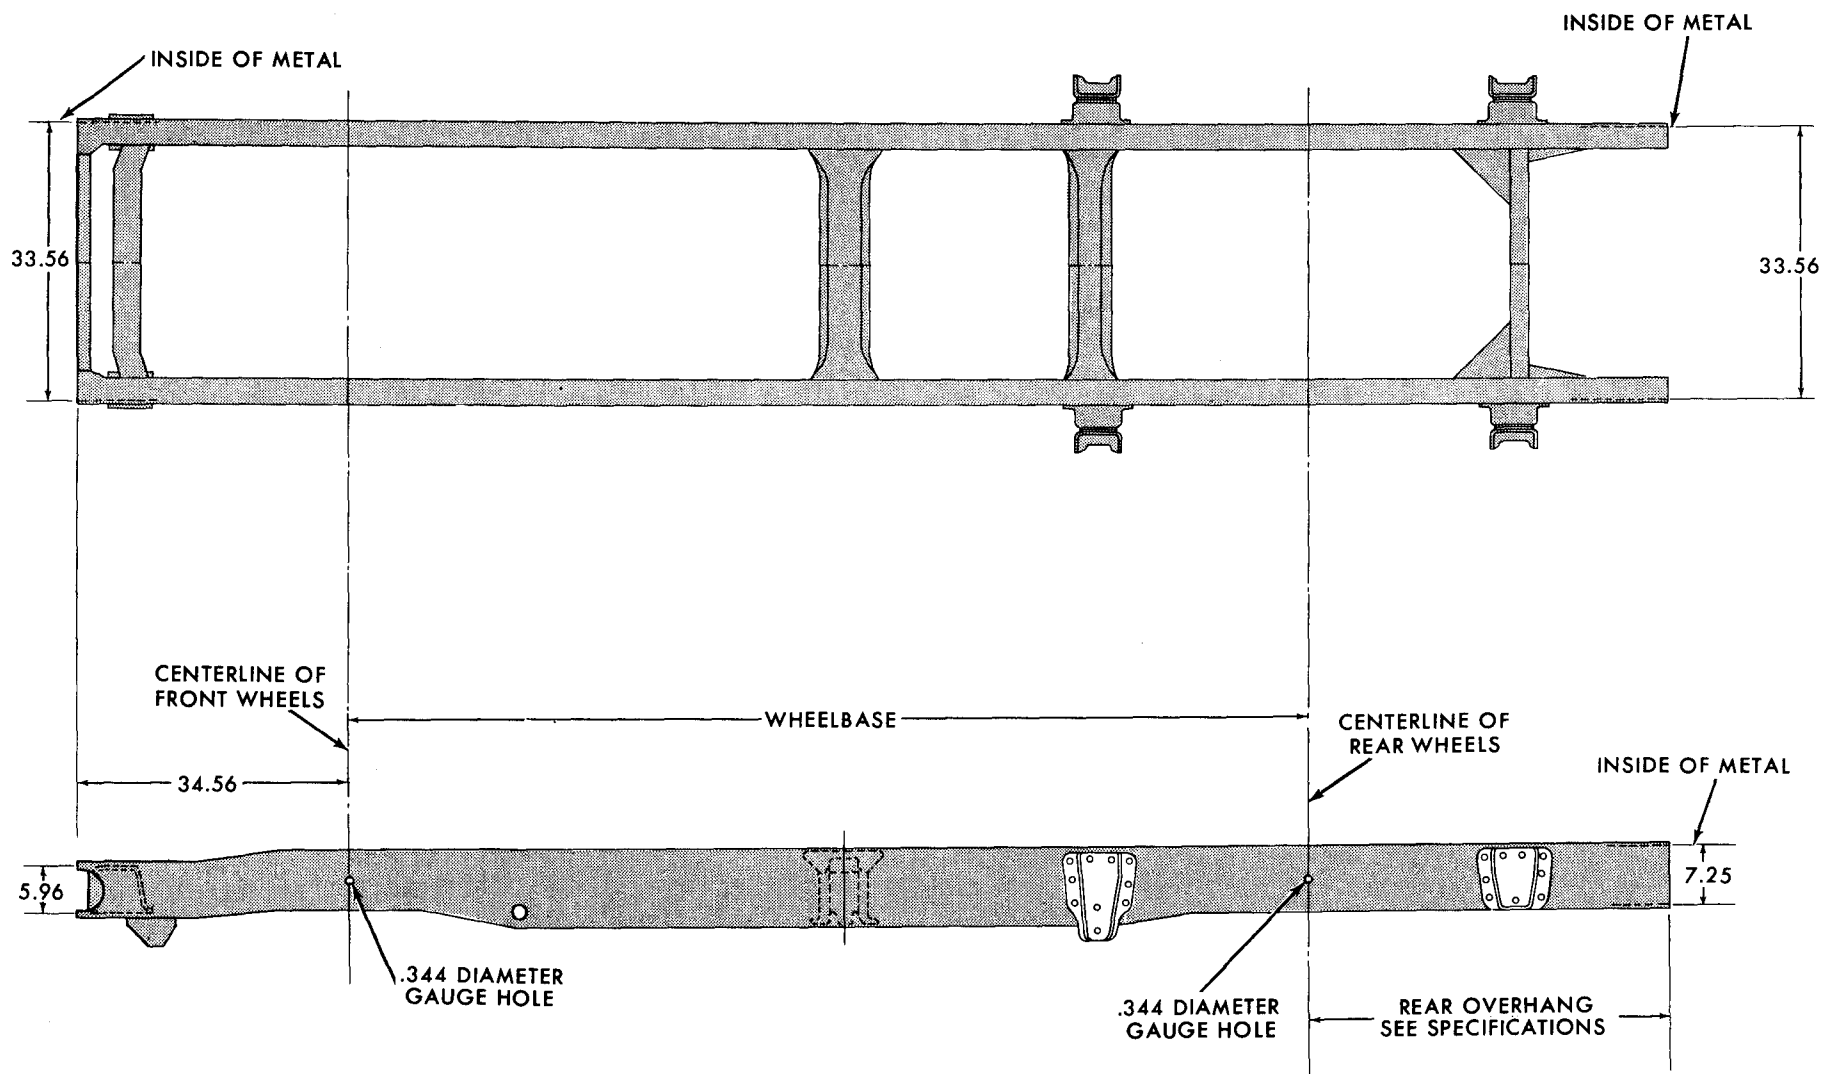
Frame Dimensions—D500, D600, D700, D800, S600, S700
